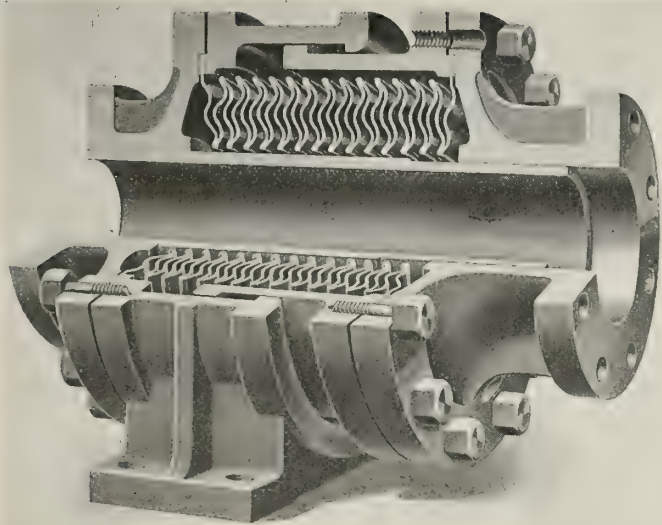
Ray Expansion Joint—Section Showing Details of Construction
